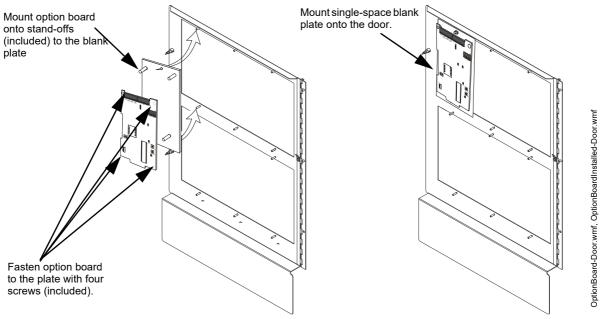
Door-Mounting Option Boards with a Single-space Blank Plate
